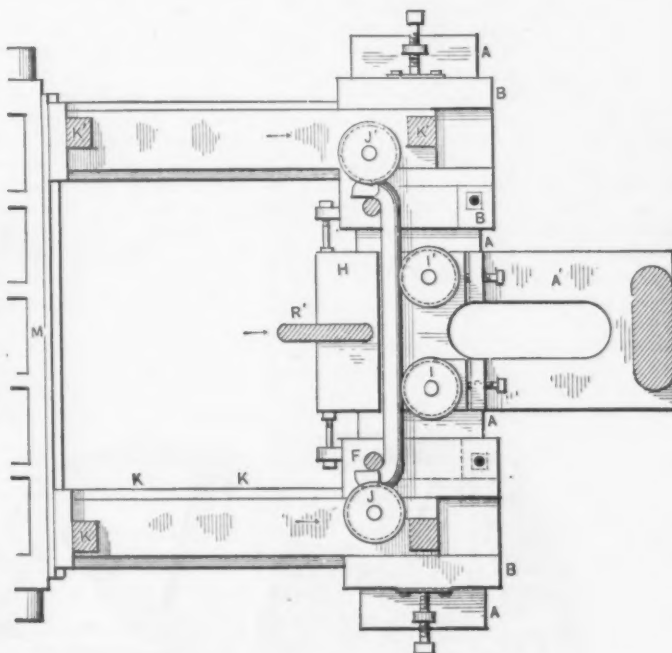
Section Similar to Fig. 4, but with the Parts Retruded.
